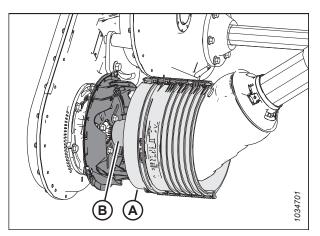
Driveline Installed on Float Module Gearbox Shaft
